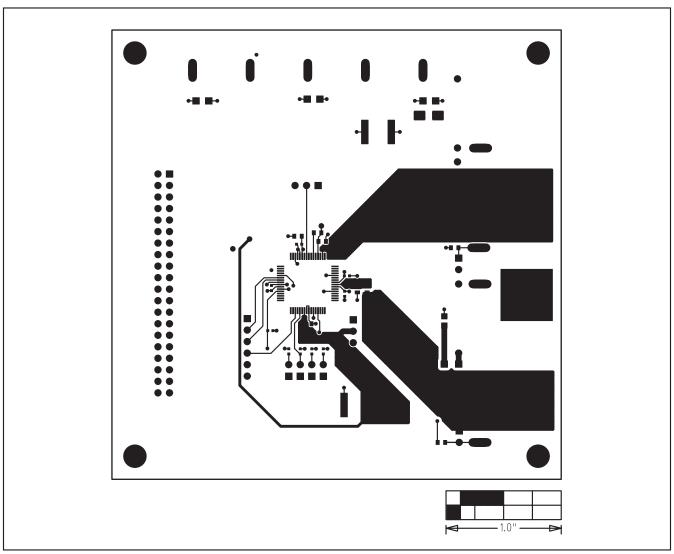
MAX5661 EV Kit PCB Layout—Component Side
